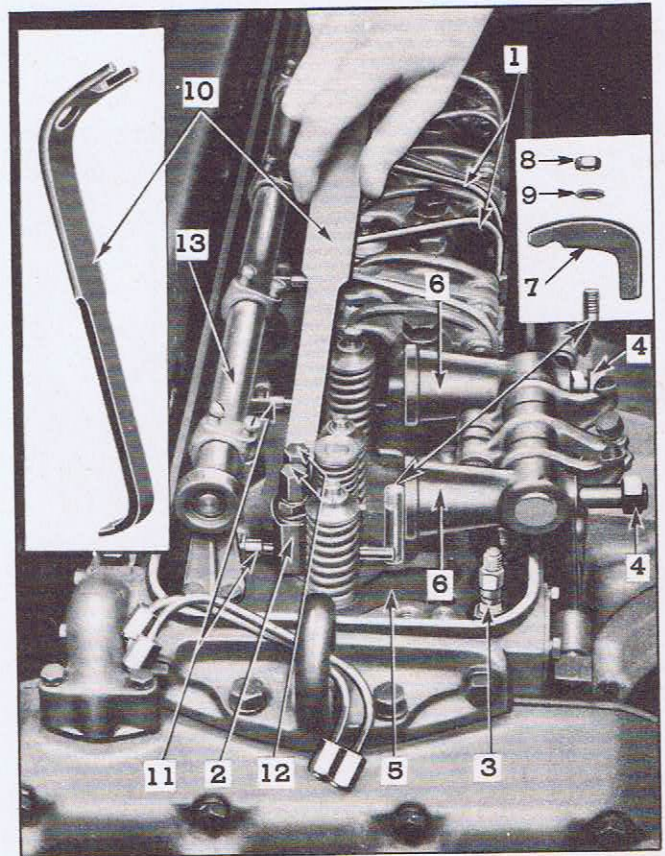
REMOVING INJECTOR FROM CYLINDER HEAD WITH TOOL J-1227-1.
